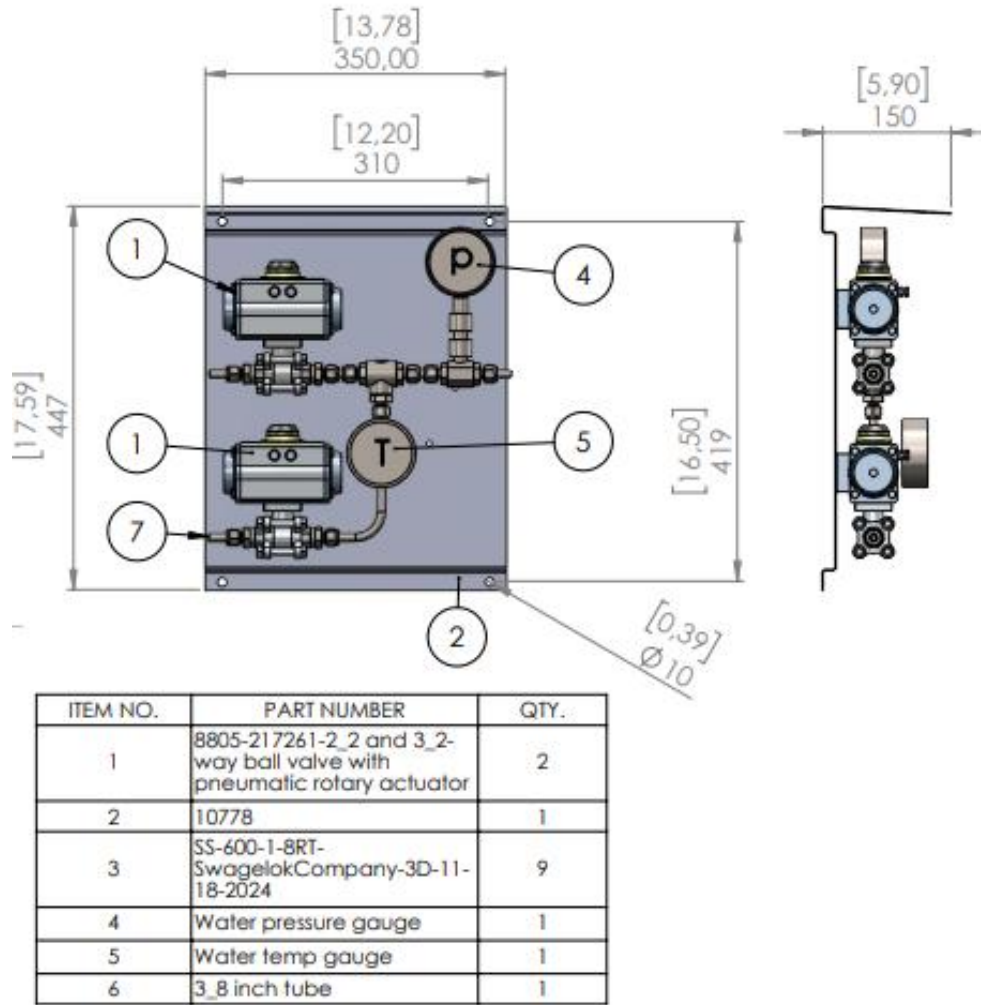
System components for hot condensate wash for the Retractable refractometer DCM-20 PASVE® (Drawing 10779).
